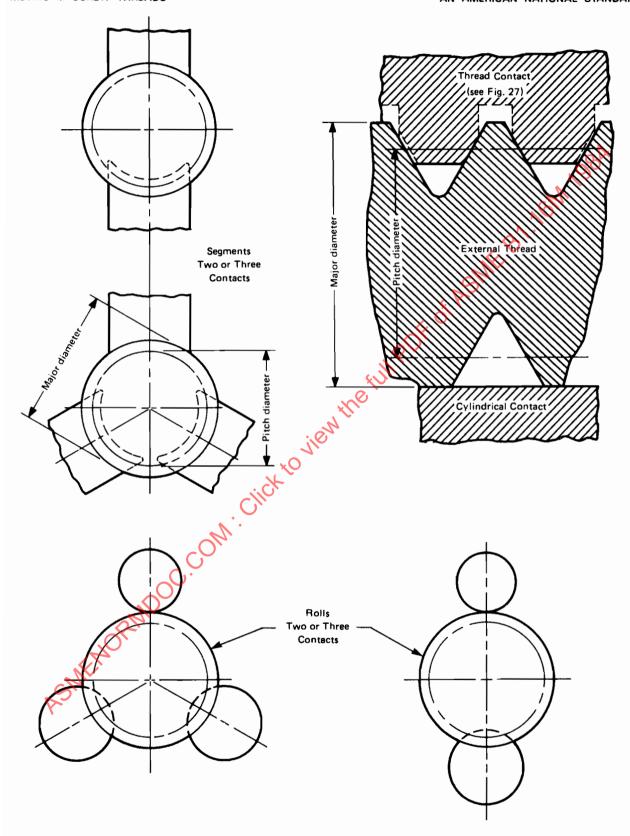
INDICATING THREAD GAGES — DIAMETER RUNOUT — MAJOR TO PITCH
